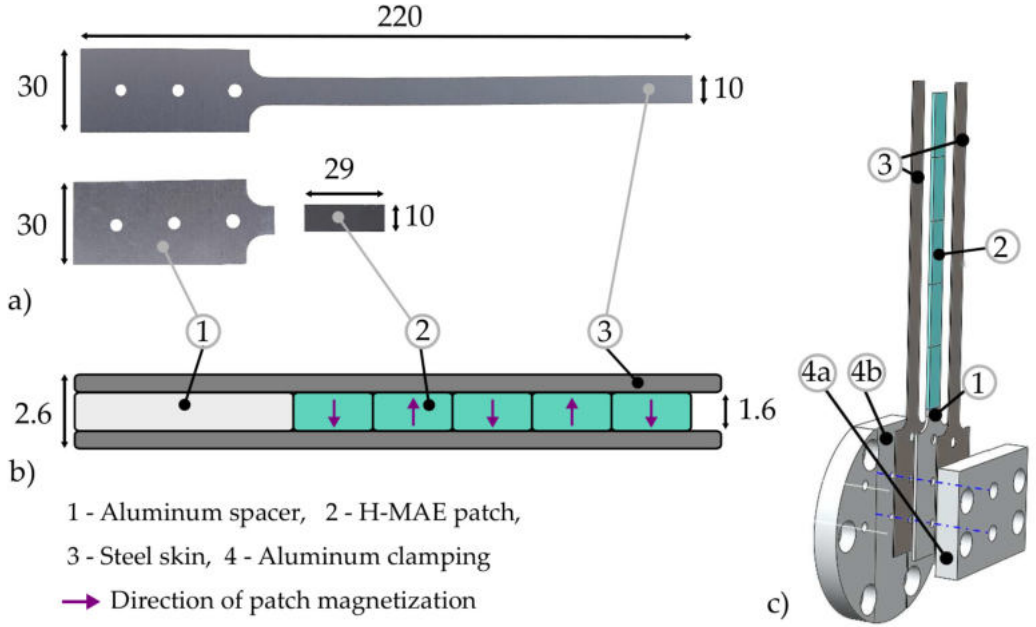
Components of the MSS (a), schematic side view of the assembled MSS (b) and schematic view of the clamping (exploded view) (c).
